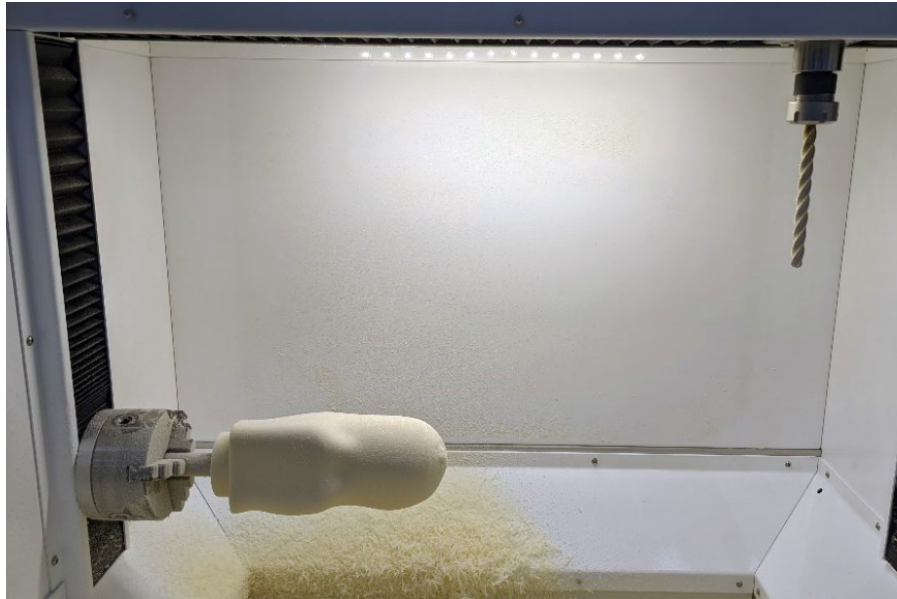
Spindle and Z Axis Locations After a Finished Carve
